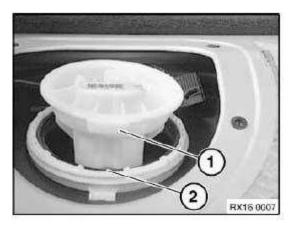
Fuel Level Sensor Lug And Tank Recess Courtesy of BMW OF NORTH AMERICA, INC.
